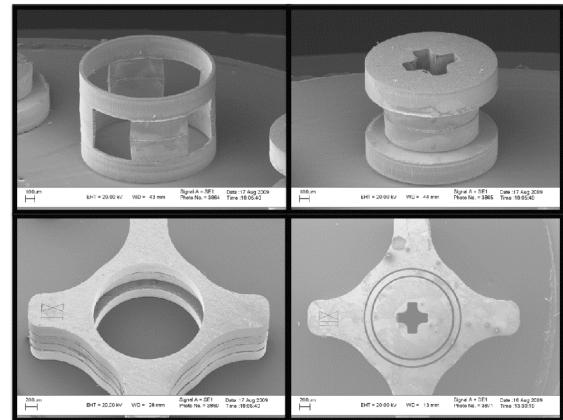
SEM images of the micromachined bearing parts: ball cage (top left), rotor (top right), stator (bottom left) and fully assembled device (bottom right).
